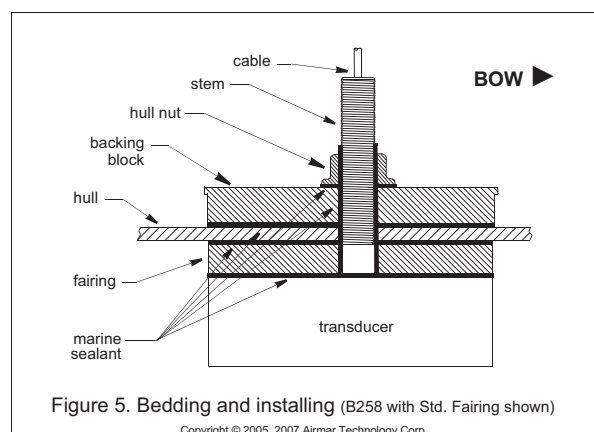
Bedding and installing (B258 with Std. Fairing shown)
